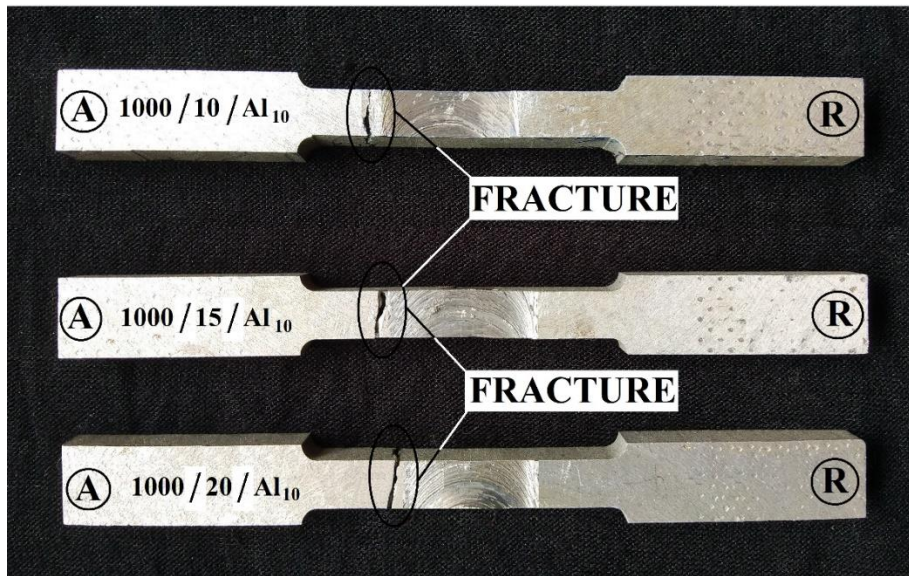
Macro image of fractured tensile test specimen of friction stir welded Al-10Mg-8Ce-3.5Si aluminium alloy joint
